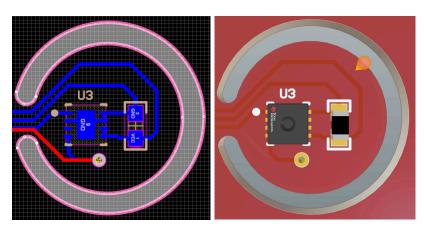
HDC3020 PCB Layout Example with Slot Cut Around HDC3020
